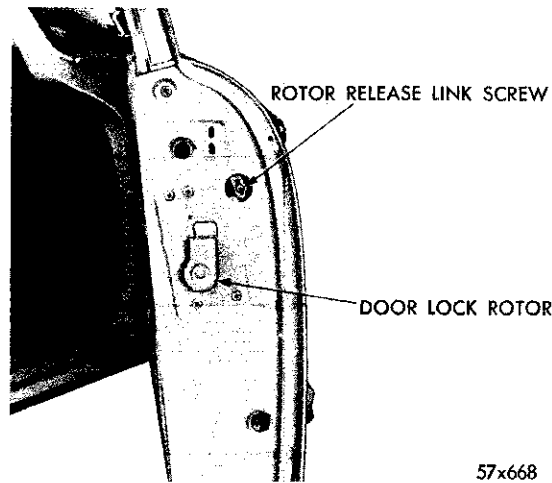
Door Lock Rotor Release Link Attaching Screw
